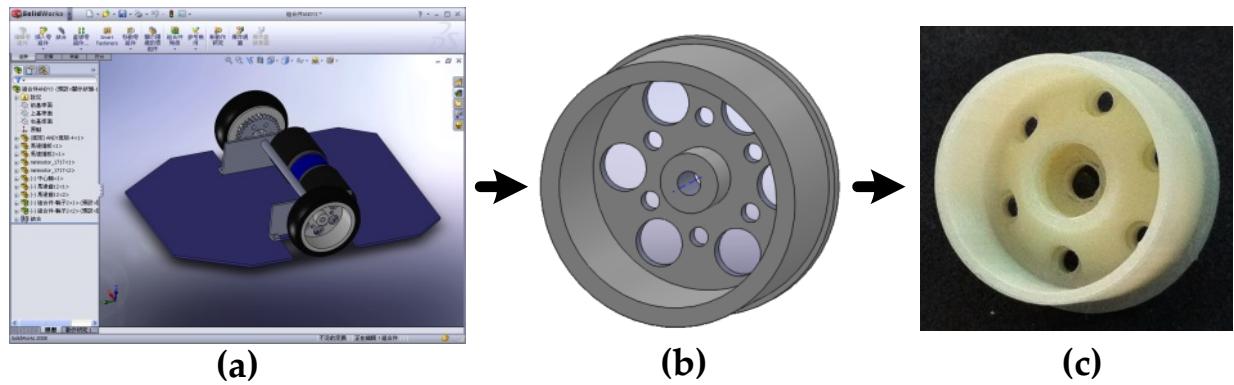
The use of computer-aided design software to (a) design and assemble a Micromouse, (b) convert the wheel model for rapid prototyping machine, and (c) fabricate the wheel in industrial thermoplastic material
